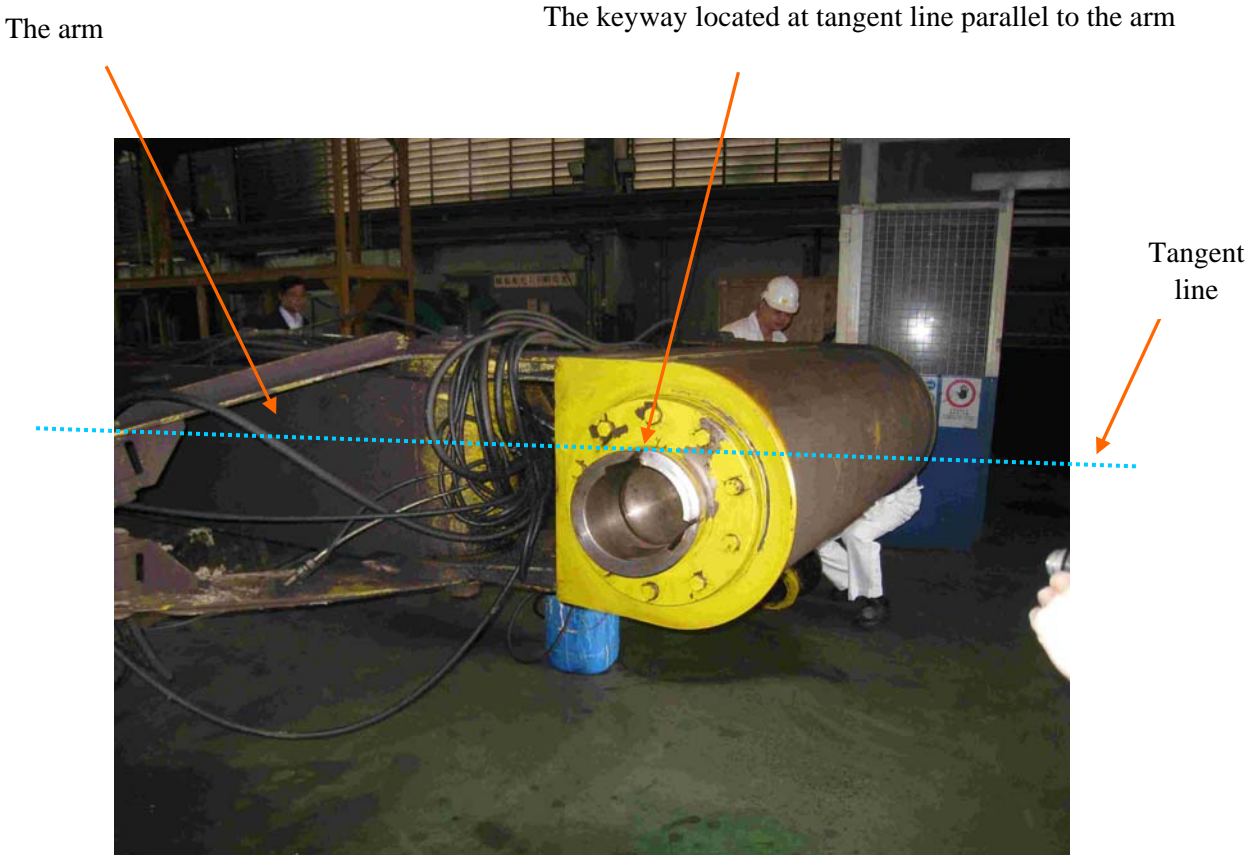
The Arm and Hydraulic Support Frame of No.2 Dock Arm
